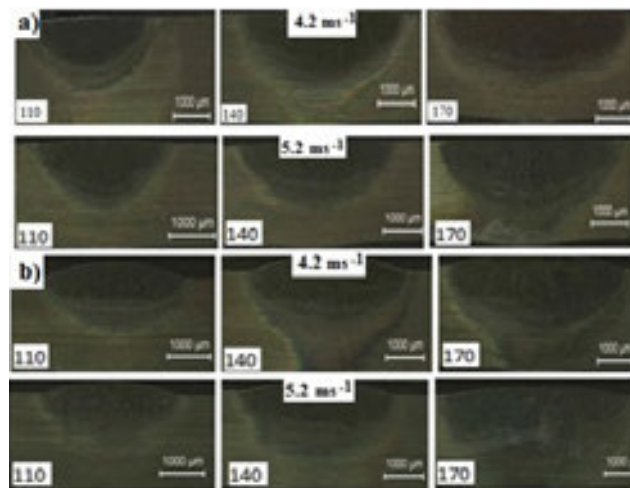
Stereo microscope images taken from cross sections of welding beams using a) without b) consumable in different welding currents
